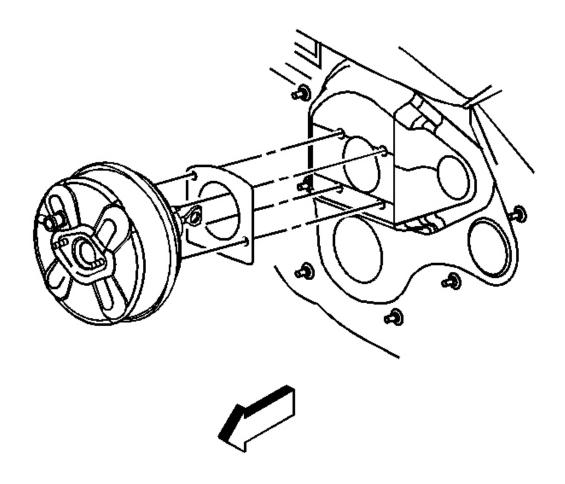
Vacuum Booster Mounting Nuts, Gasket And Booster Assembly Courtesy of GENERAL MOTORS CORP.
